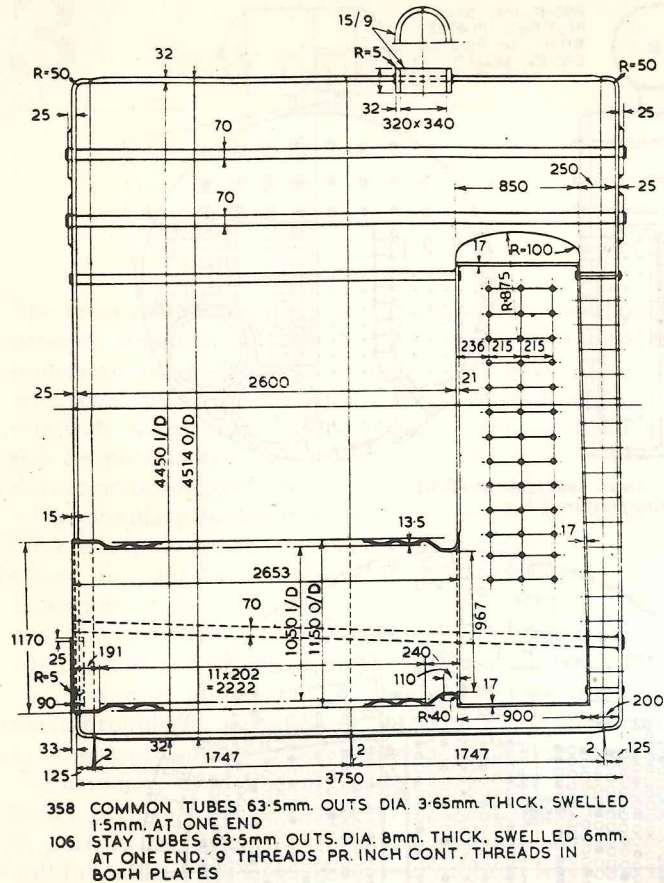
(c) Sectional view of the 1950 Scotch boiler
